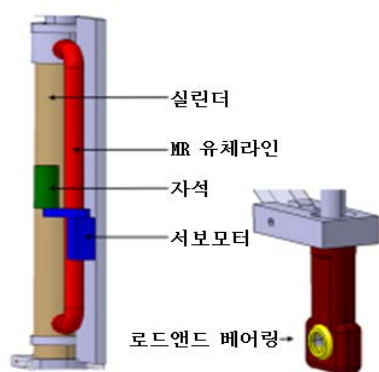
Rotation Resistance Mechanism and Rod-end Bearing
